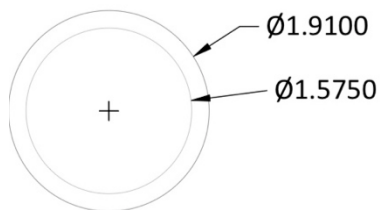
AutoCAD sketch of the washer part, which helped to secure the filtration membrane.
